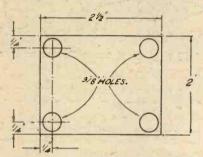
Making a rectangular hole 2 ins. by 21 ins.
